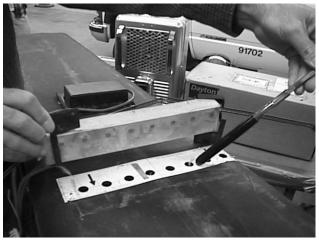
Old Micro-Trak® sensor mount with drilled holes exposed.
